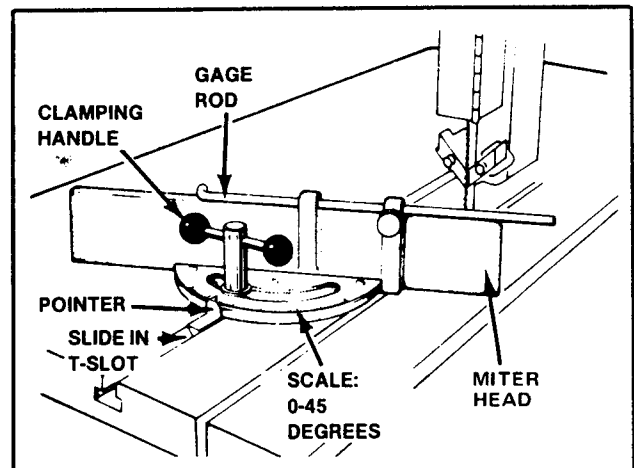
PROTRACTOR WORKSTOP & ALIGNING GAGE.
